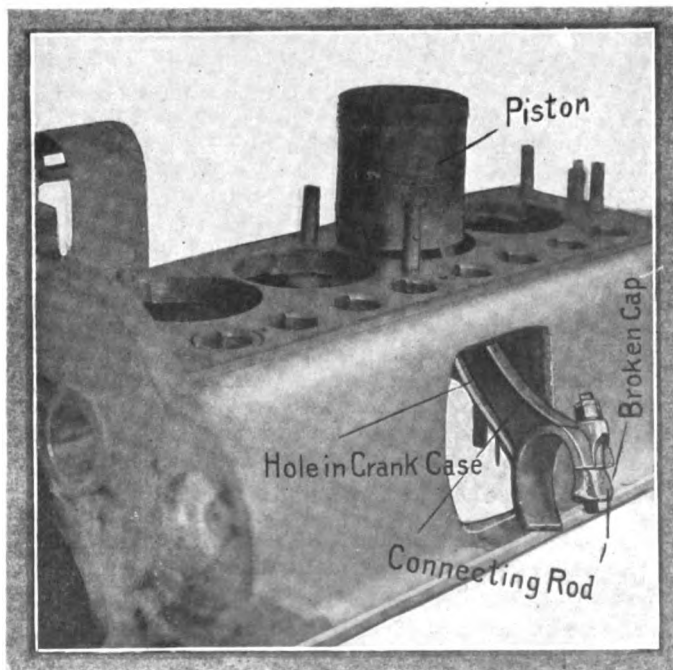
A case where a broken cap bolt was responsible for further damage. The connecting rod has pierced the crankcase wall
